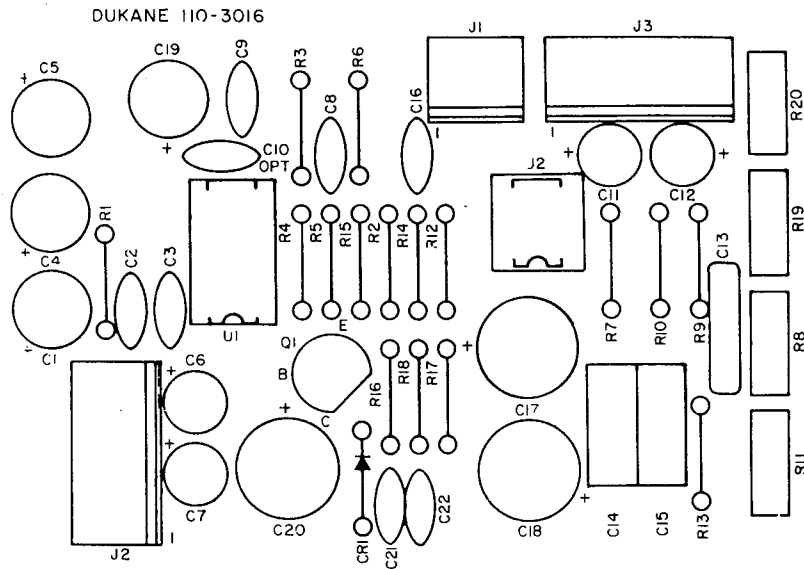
Parts Layout on 110-3016 Amplifier Driver Module
